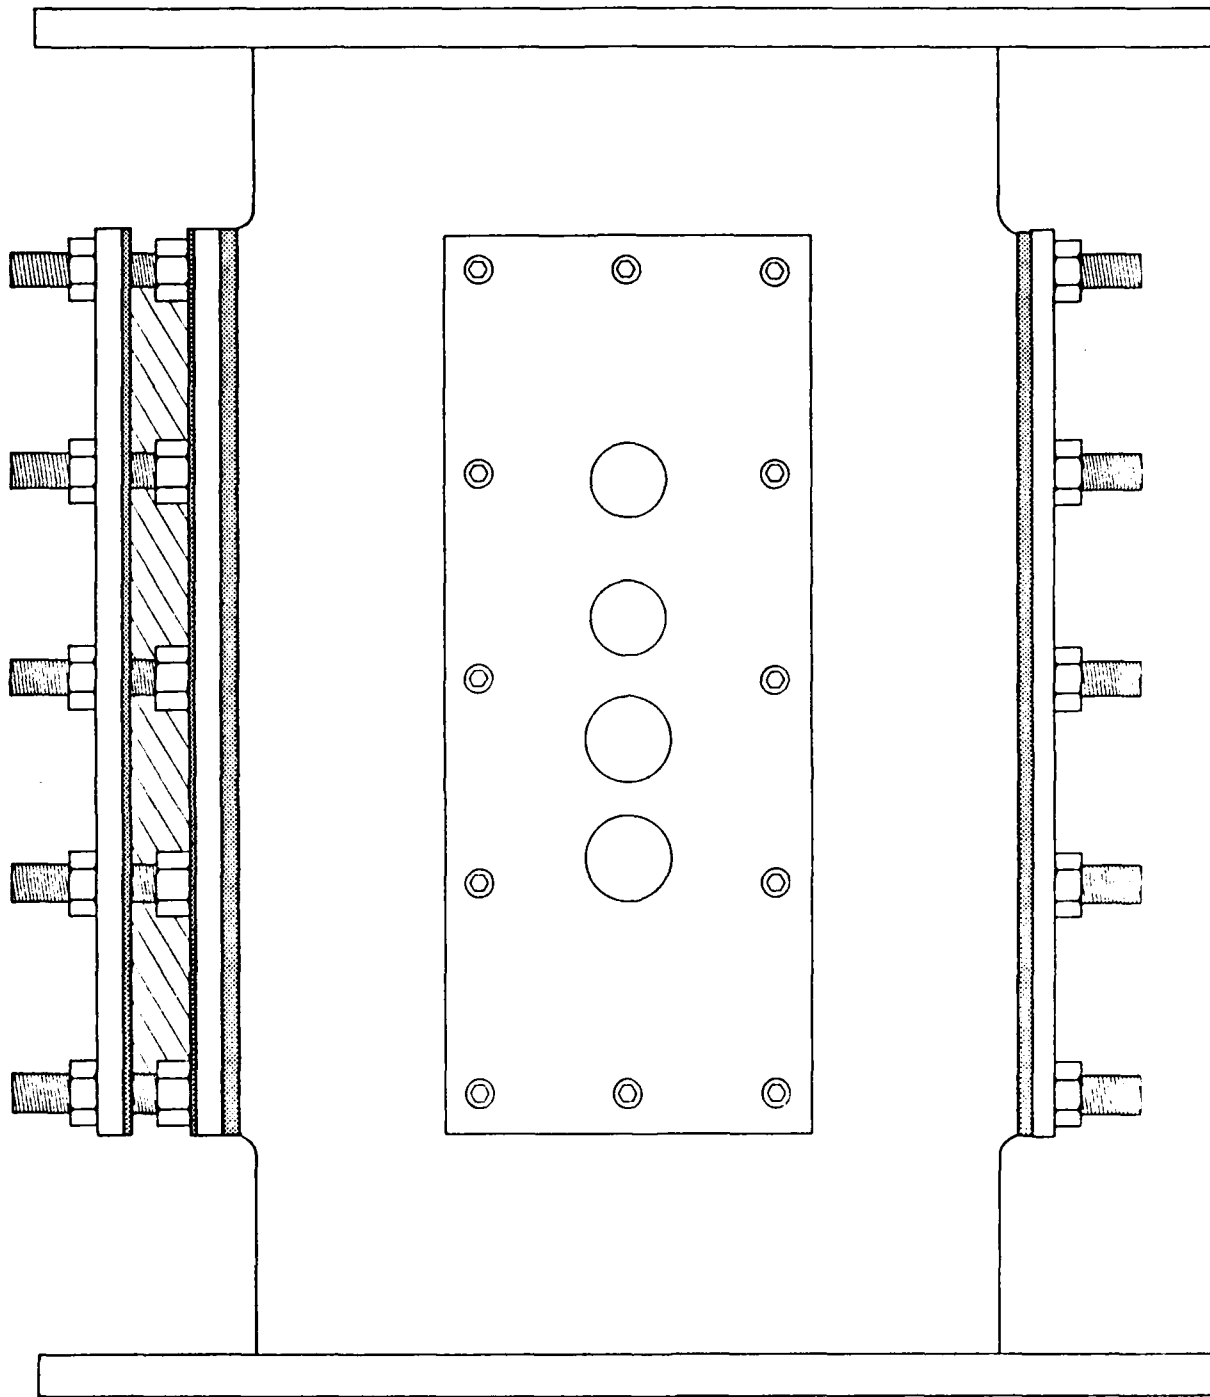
Schematic of Test Section Showing Tube Sheet
